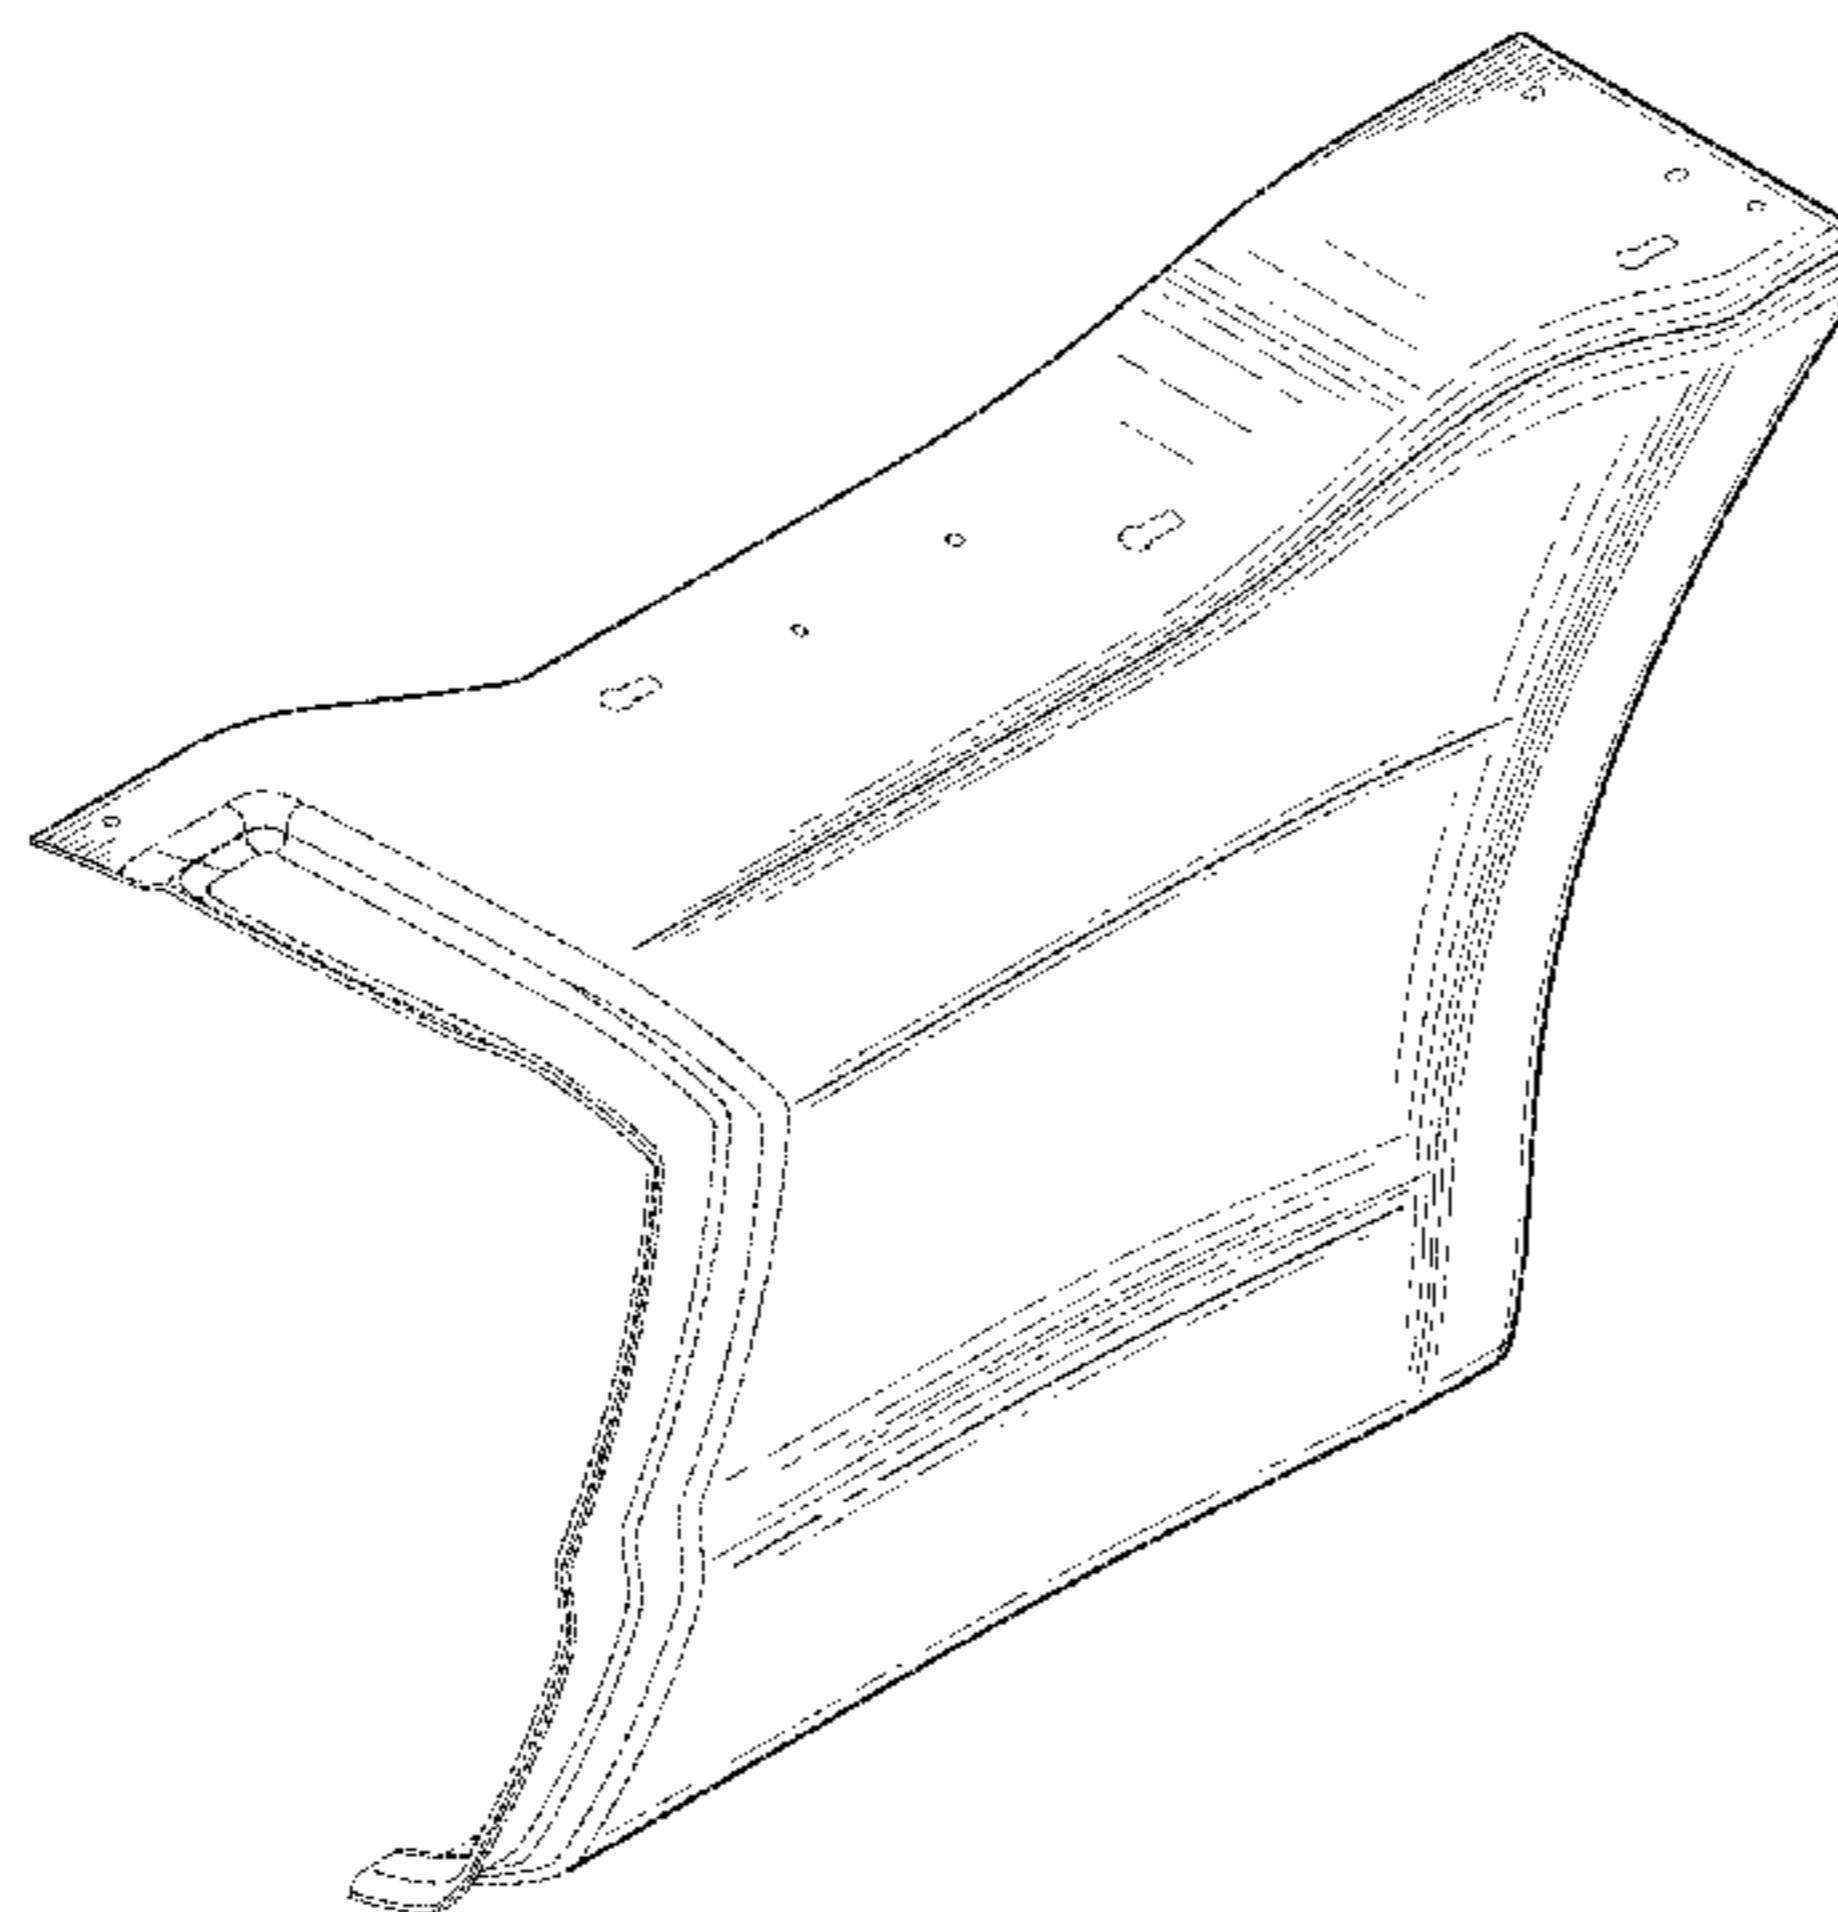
is a left side view of the rear fairing of FIG. 1; and,
